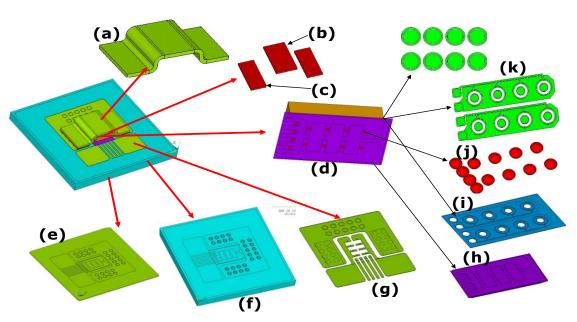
Components of package structure (a) Copper foil, (b) solder layer between copper foil and die, (c) solder layer between copper foil and PCB, (d) chip package, (e) copper layer on the bottom of the FR4 PCB, (f) FR4
